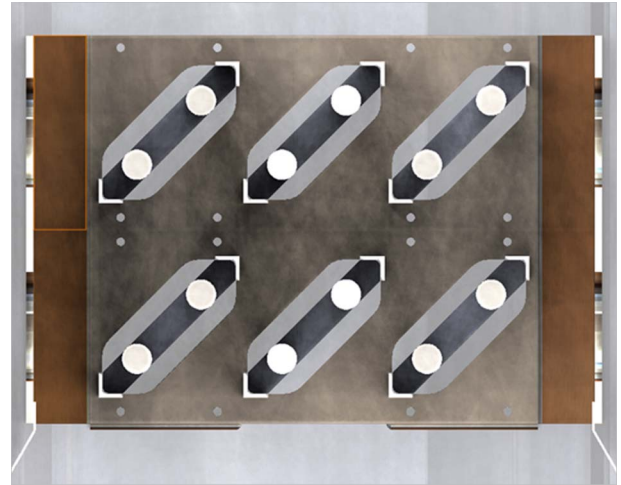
Illustration from above of the magnetic rods mounted on a guiding shoe that will follow the right-angle guiding support frame
